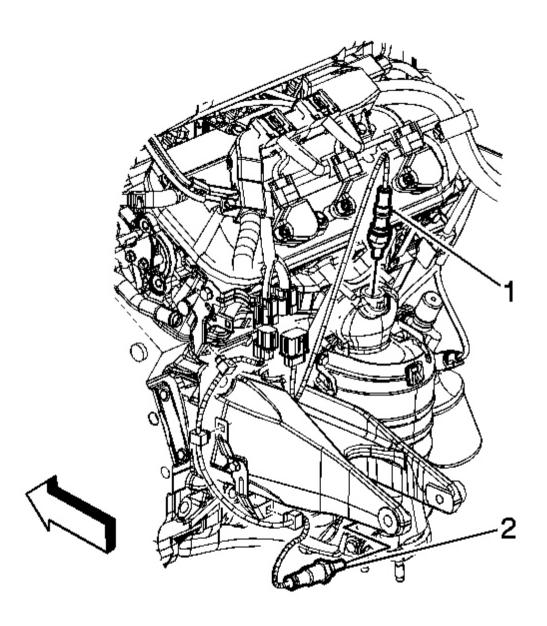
View Of Heated Oxygen Sensor Courtesy of GENERAL MOTORS CORP.
